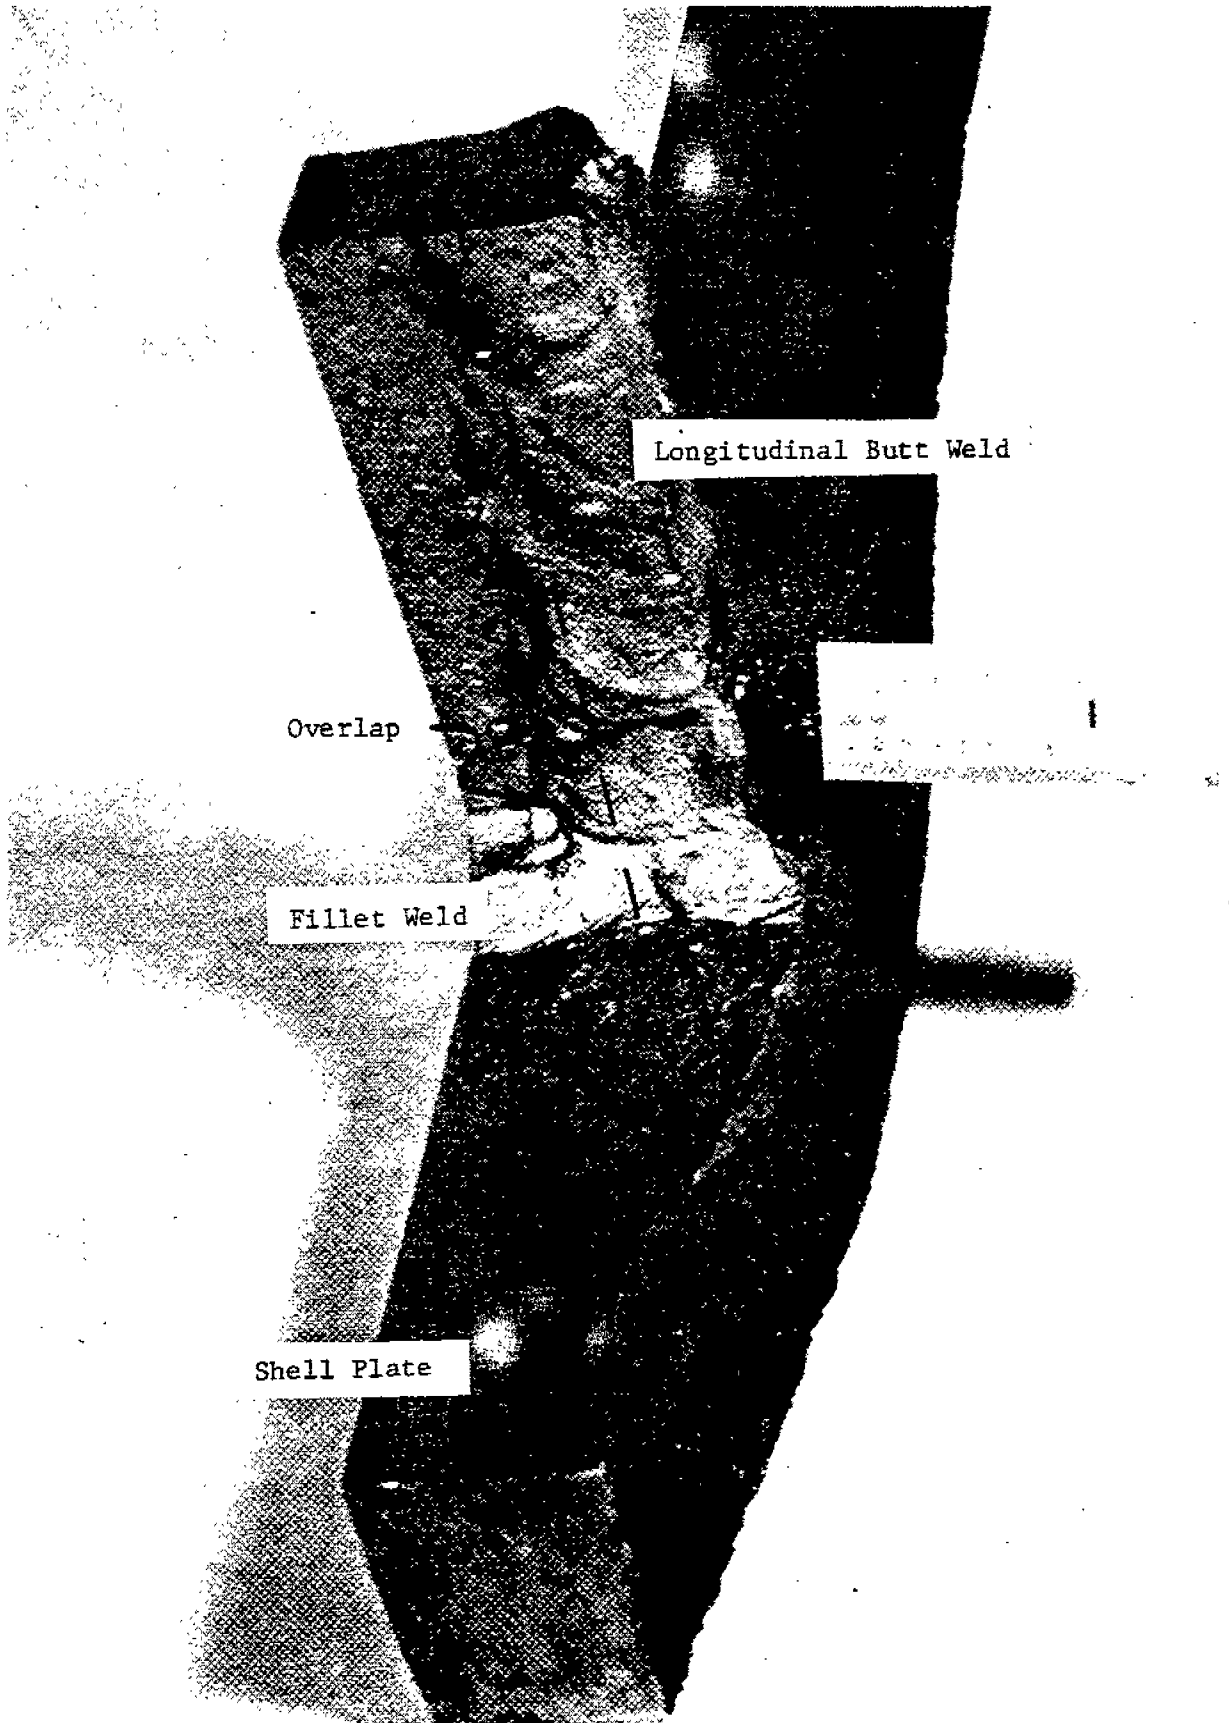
Weld Joint of Longitudinal to Shell Plate Looking at Upper Surface of the Longitudinal Butt Weld. Section through line A-B shown in Figure 3-44. Specimen No. 3908; Magn: 1.9X.
